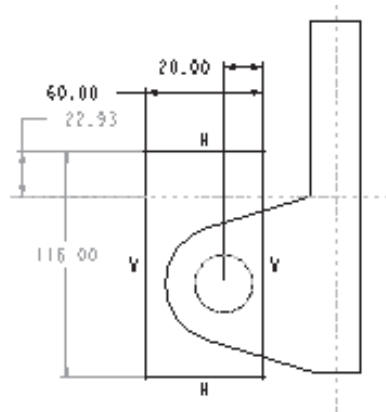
Sketch with dimensions and constraints for the cut feature
